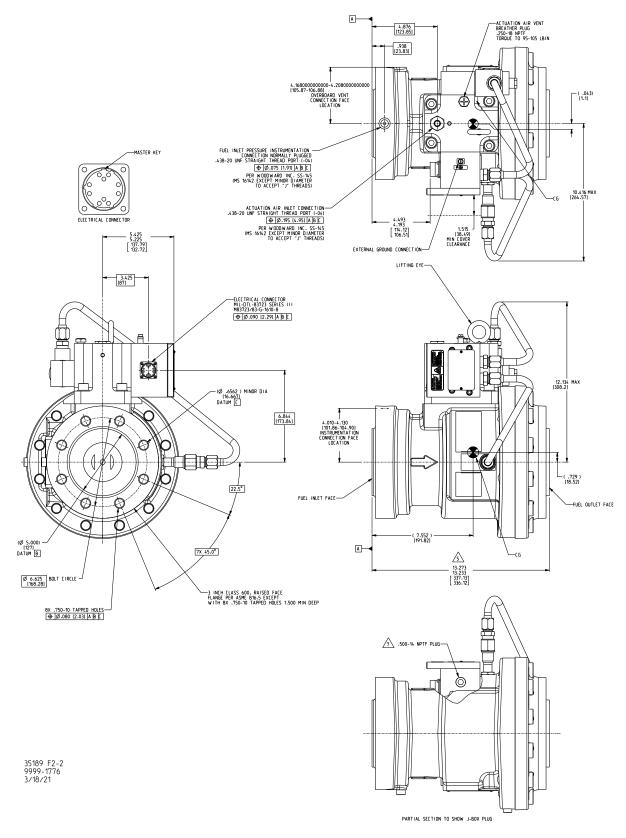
GSOV80 Connector Version Outline Drawing (Side A)
